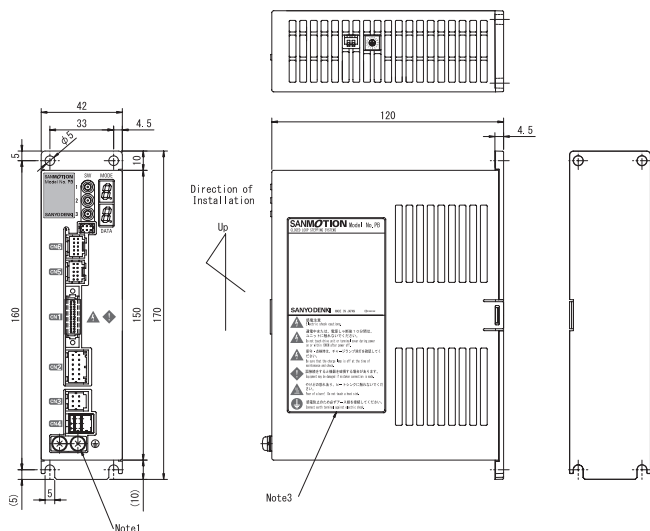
Dimensional outline drawing / exterior view of the amplifier
